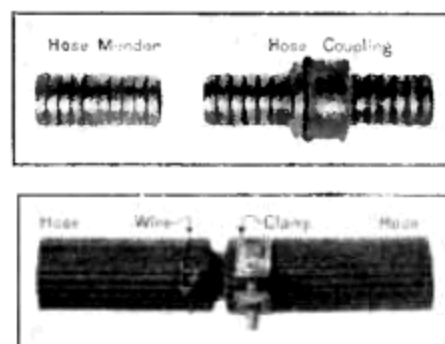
Hose menders: Above, hose mender and hose coupling; below, two pieces of hose joined with a mender. The left-hand piece is fastened with wire twisted with a pair of pliers, and the right-hand piece is clamped.
